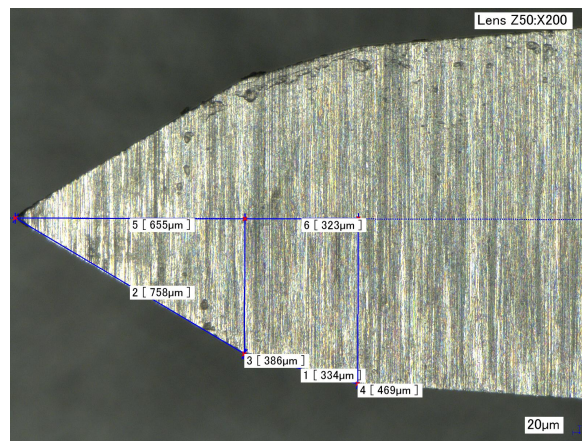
Close up microscope image showing a HSS feed horn fabrication drill tool with the correct cutting profile dimensions.
